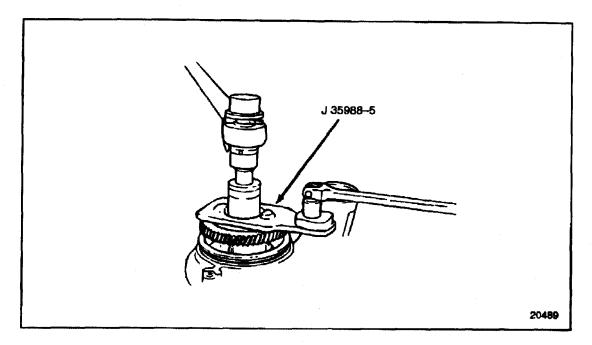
Water Pump Drive Gear Locknut Removal (FM)
